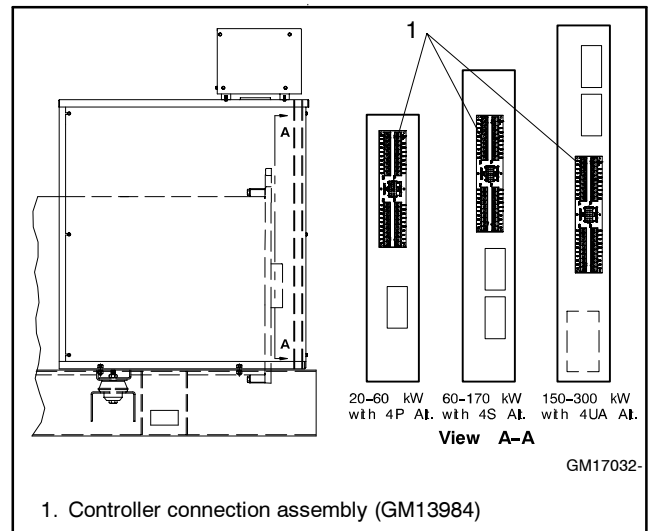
Controller Connection Assembly Mounting Locations in Junction Box (20-300 kW)
